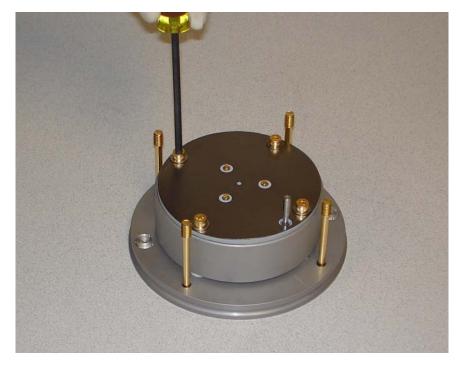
Loosen and Remove the Hardware to Reach the Gas Distributor Plate.
